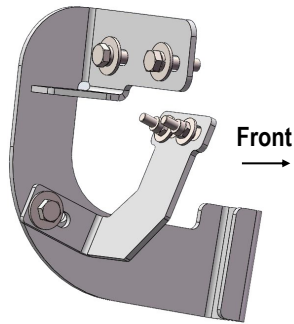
Attach Driver Front Support Bracket To Front Facing Side Of Mounting Bracket
